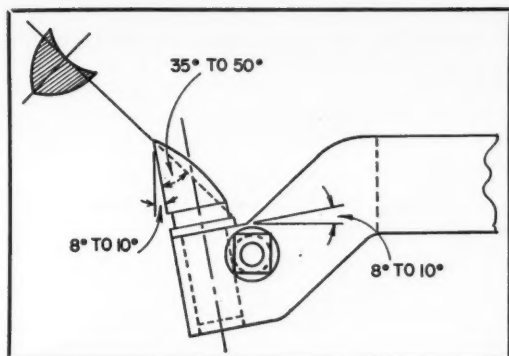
Drawing of Tool Holder Best Adapted for Machining Aluminum
